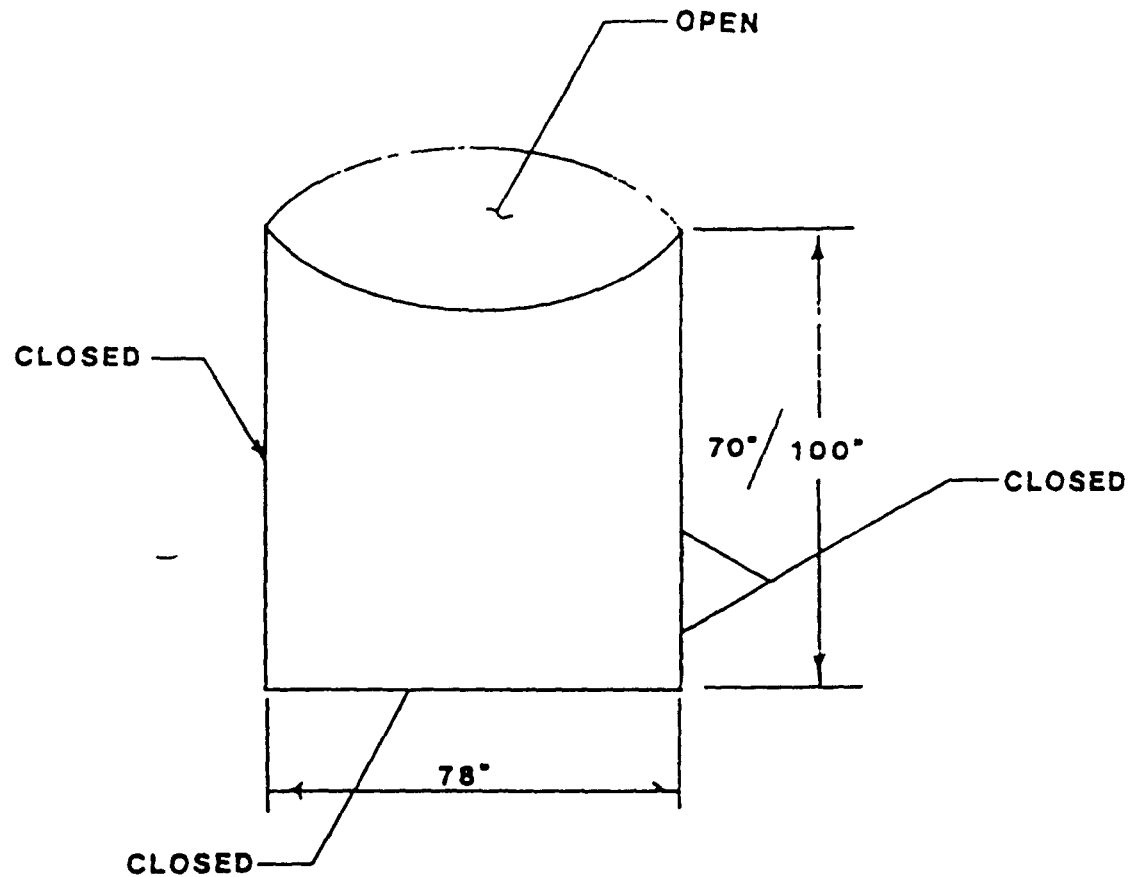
PVC LINER FOR TRIPLE WALL CORRUGATED BOX
